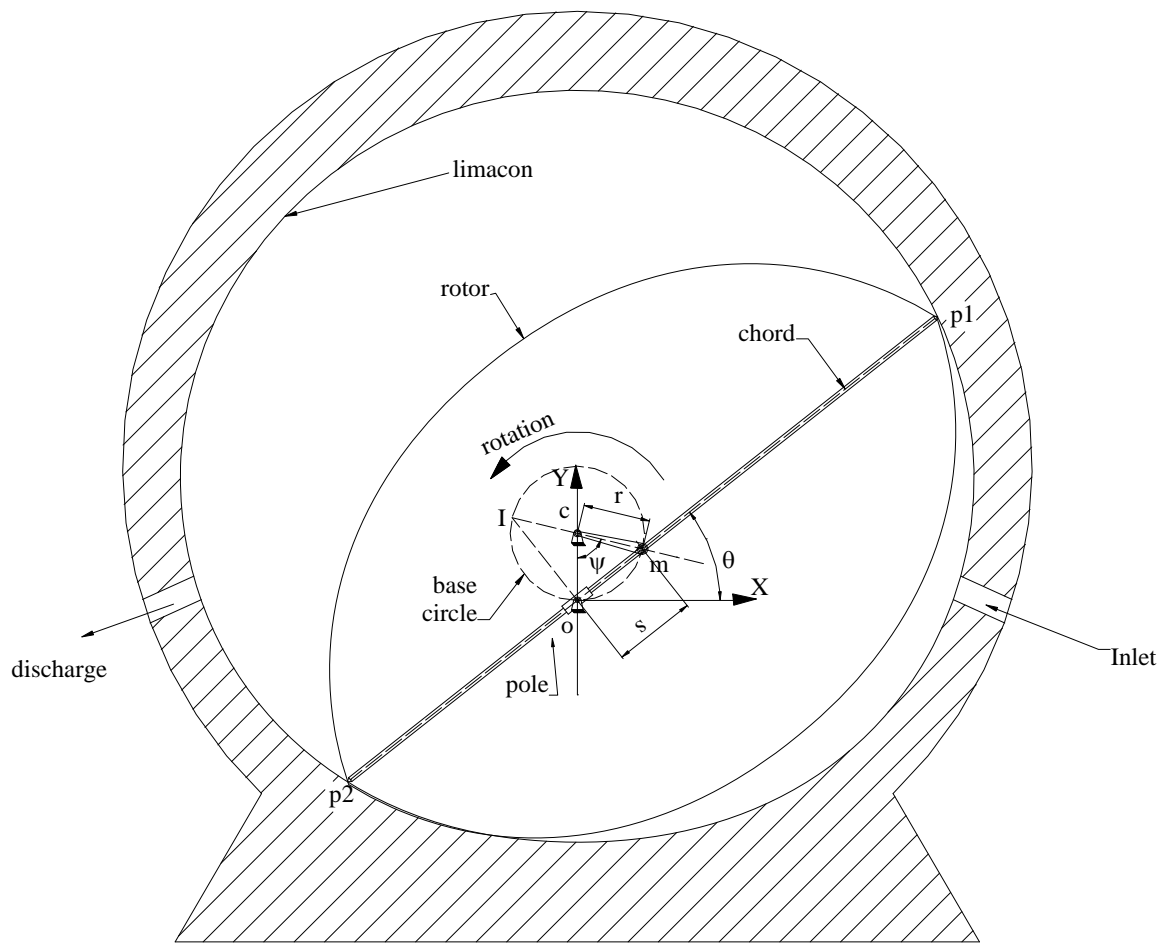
A limaçon mechanism employed for a compression-expansion machine.
